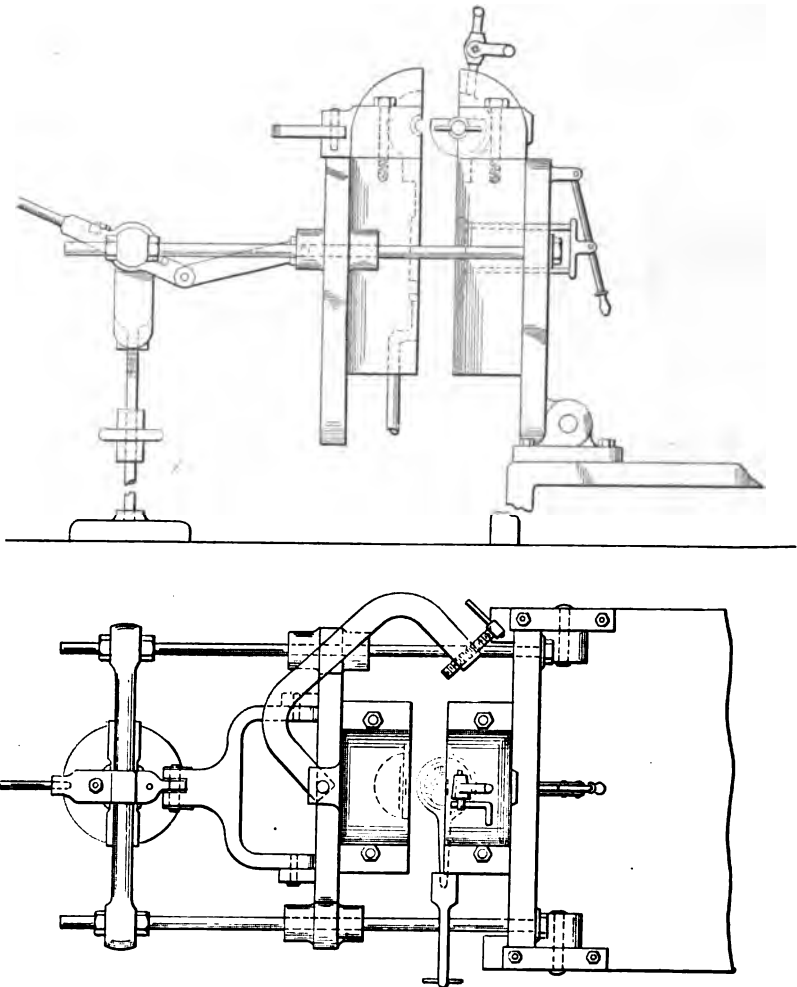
DOEHLER COMPRESSED-AIR MACHINE.
